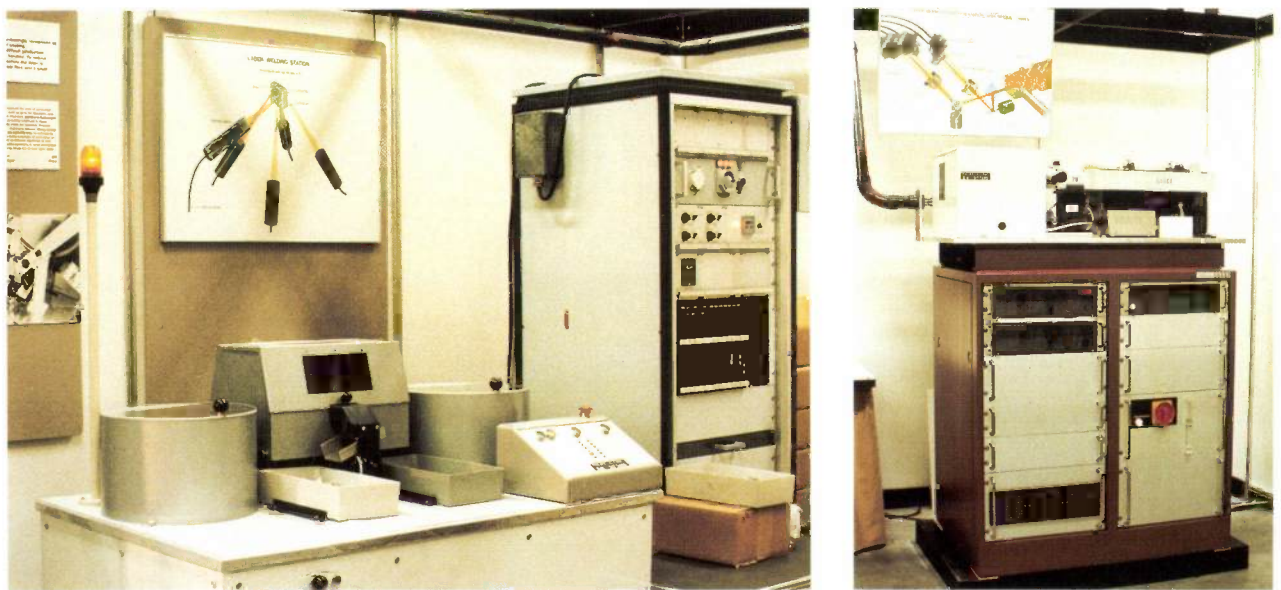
Industrial version of a laser spot-welder. In the right-hand photograph there is a large cabinet for supply and cooling of the laser, which is on the right on top of the cabinet. To the left of the laser there is a large white 'box' in which the beam is split and focused on to the optical fibres, which continue through the black tube on the left in the photograph. In the left-hand photograph the cabinet on the right contains the control electronics for the system. The welding takes place inside the approximately rectangular light-tight shield at the centre of the table. The cylinders on either side of the shield contain the feed mechanism and the working stock of components to be welded.
